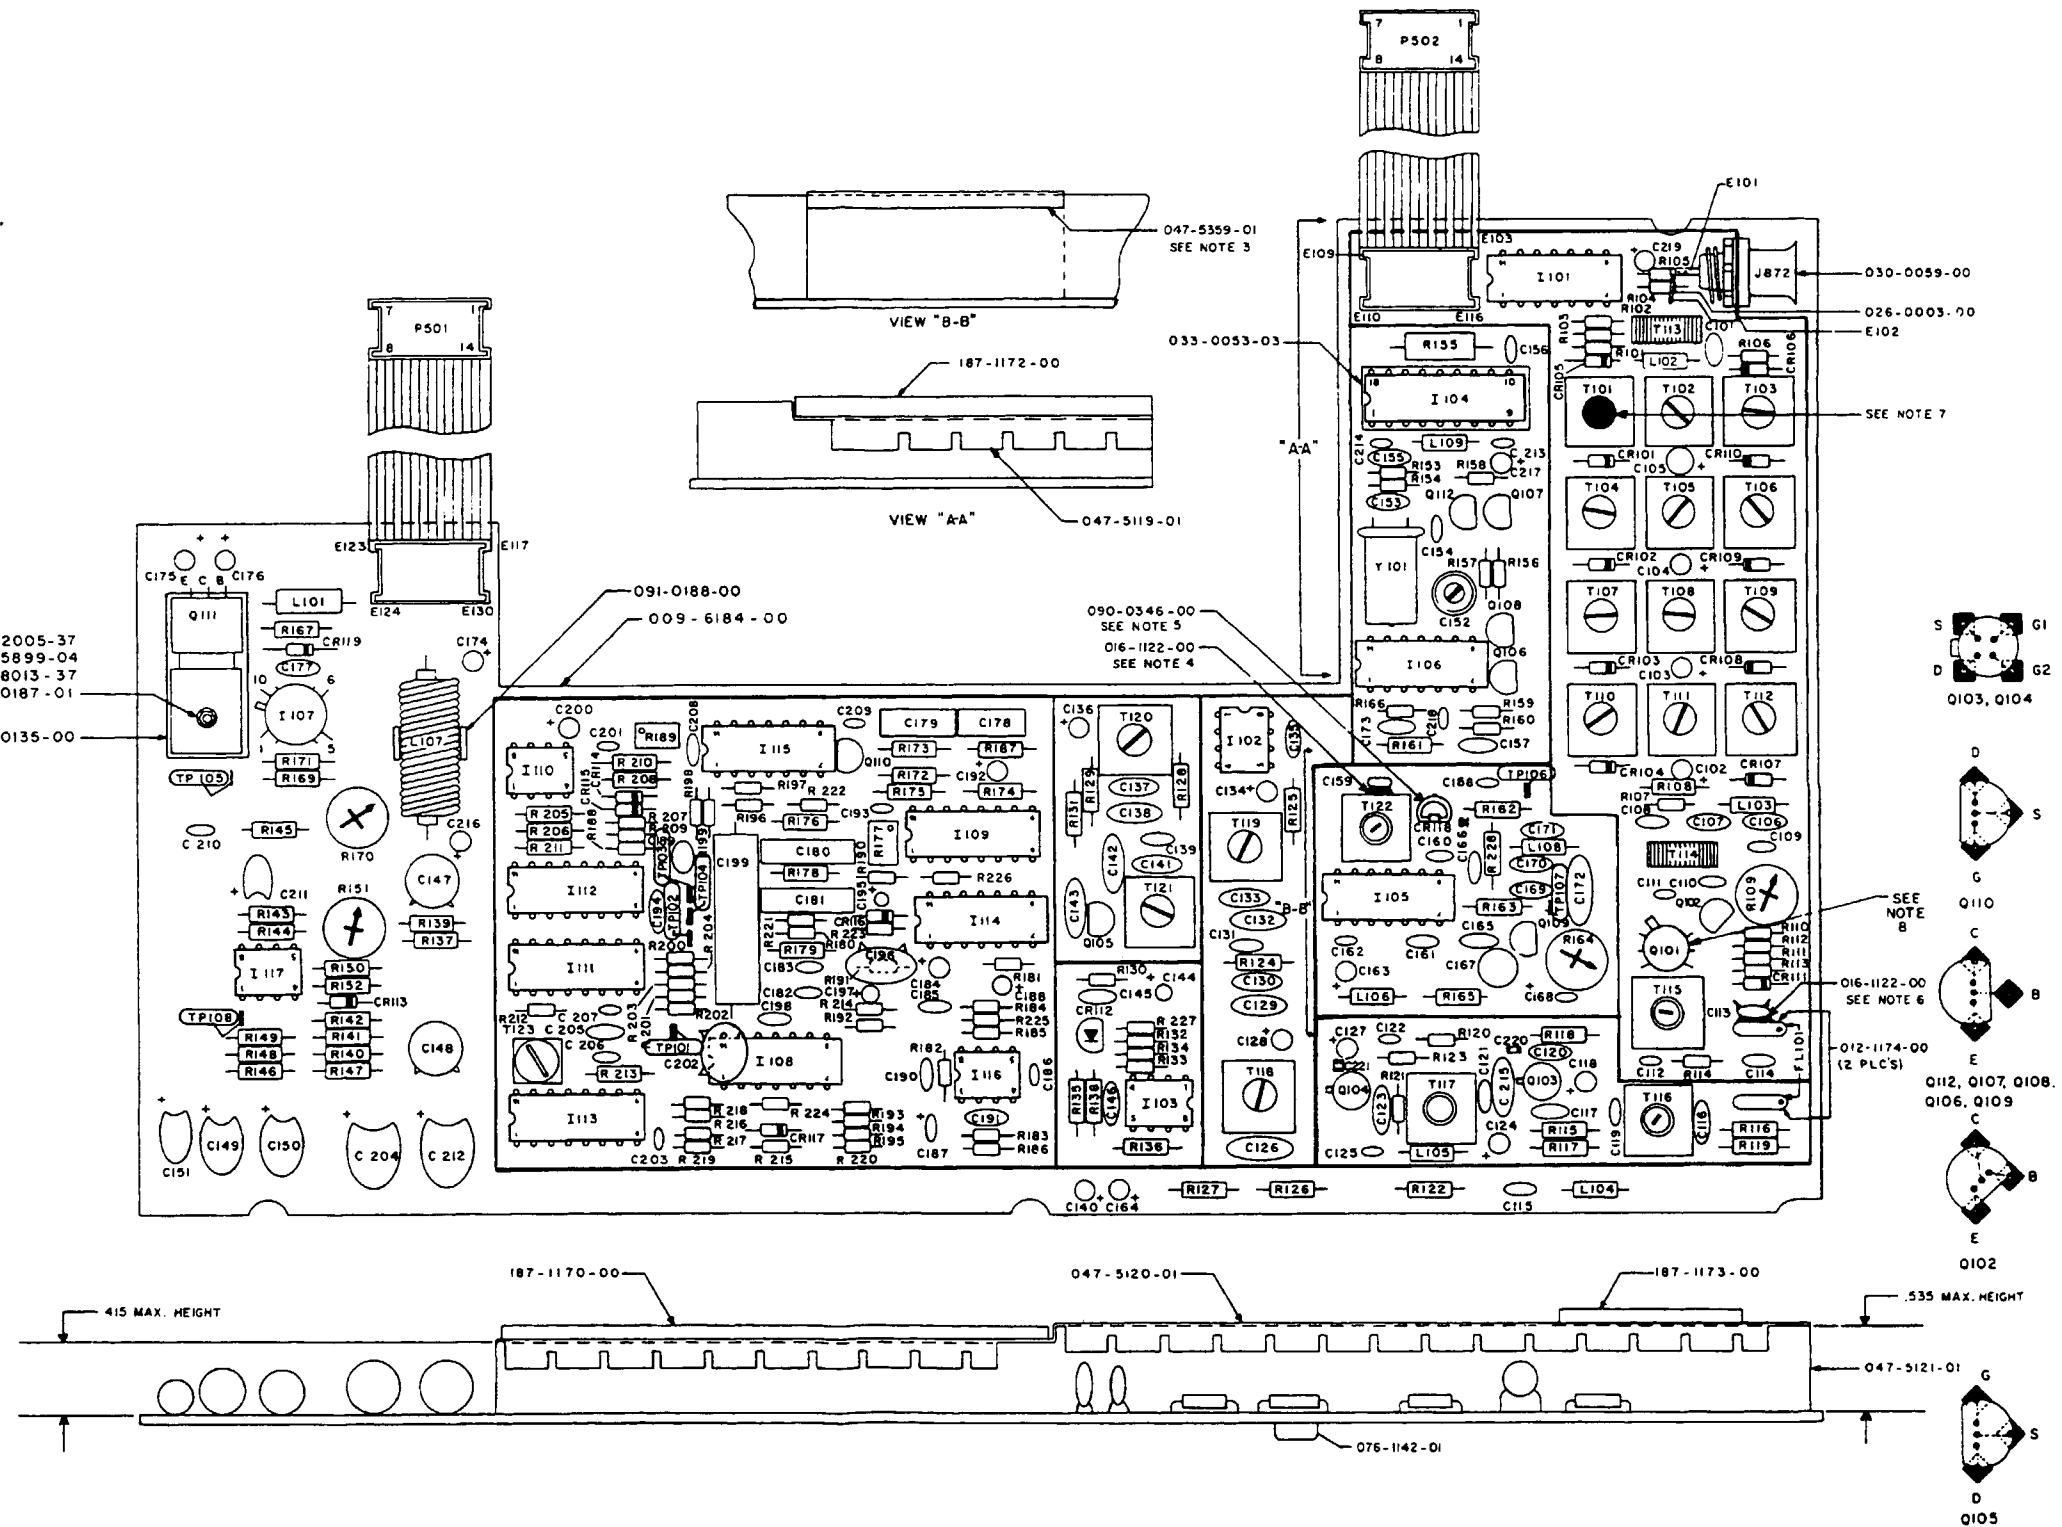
A KR 87 RECEIVER BOARD ASSEMBLY
